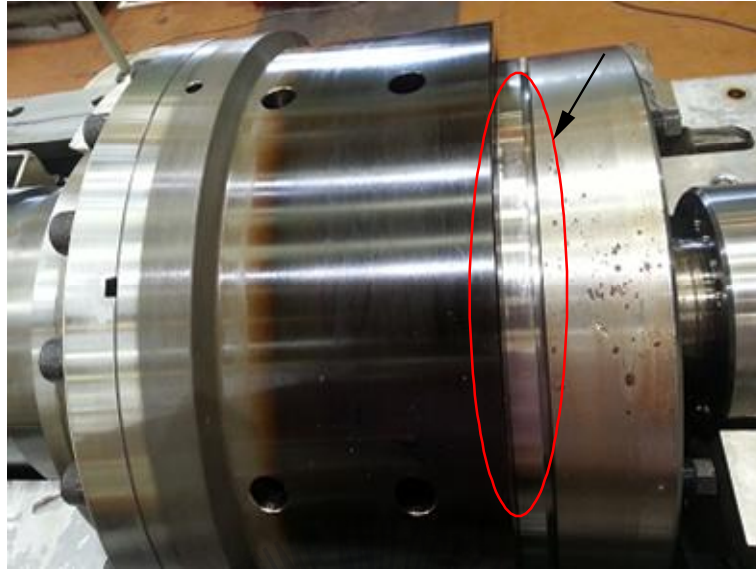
Contact marks on thrust disk by shaft bending¹⁵⁾
